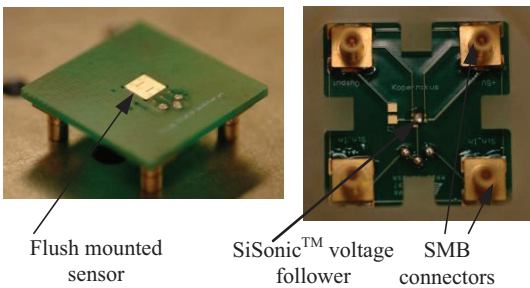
Sensor packaged on a (30 mm × 30 mm) PCB board, flush with the surface with voltage follower and electrical connections on backside of the PCB to minimize parasitics.
